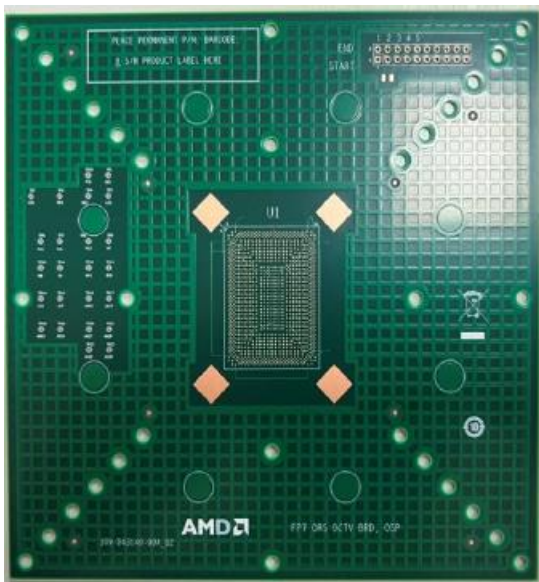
SMT PCB board design, 140mmx140mm-thickness 1.04mm/CuOSP.
